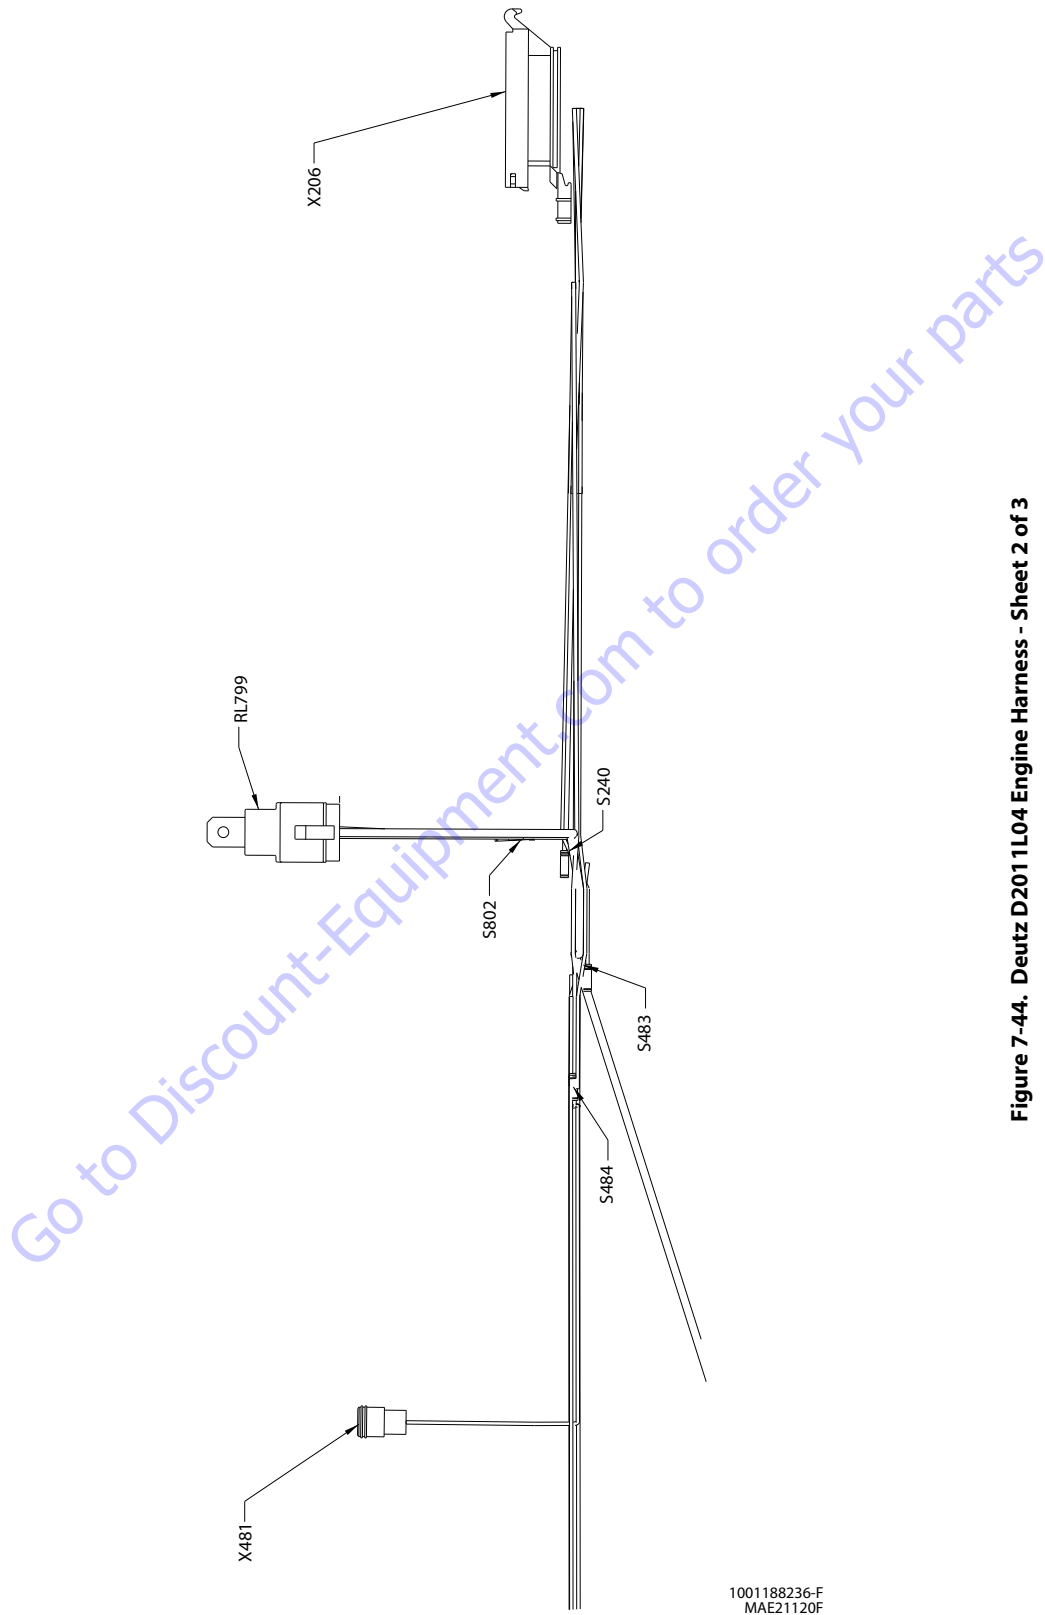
Deutz D2011L04 Engine Harness - Sheet 2 of 3
